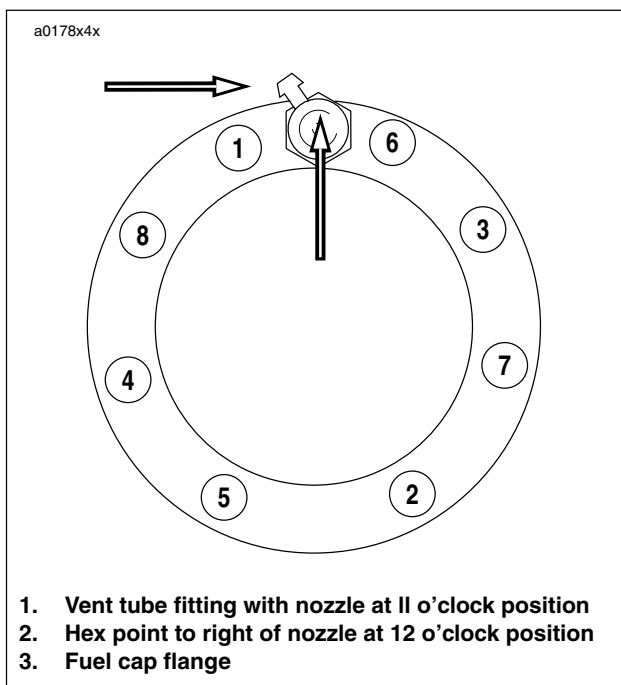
Filler Cap Flange Torque Sequence and Vent Tube Fitting Orientation
